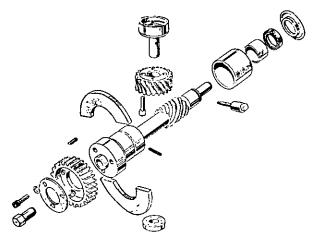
Exploded View of Auxiliary Drive Assembly (Early).
